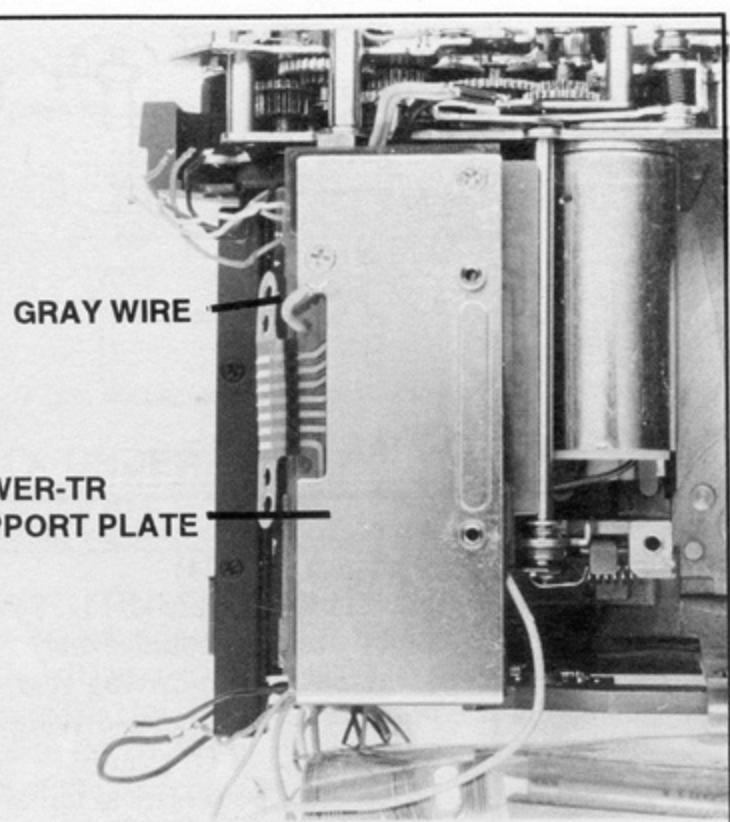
FRONT VIEW, MAIN FPC REMOVED
